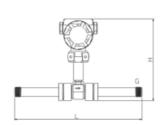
DN4-DN10mm Threaded connection type (including straight pipe section)
